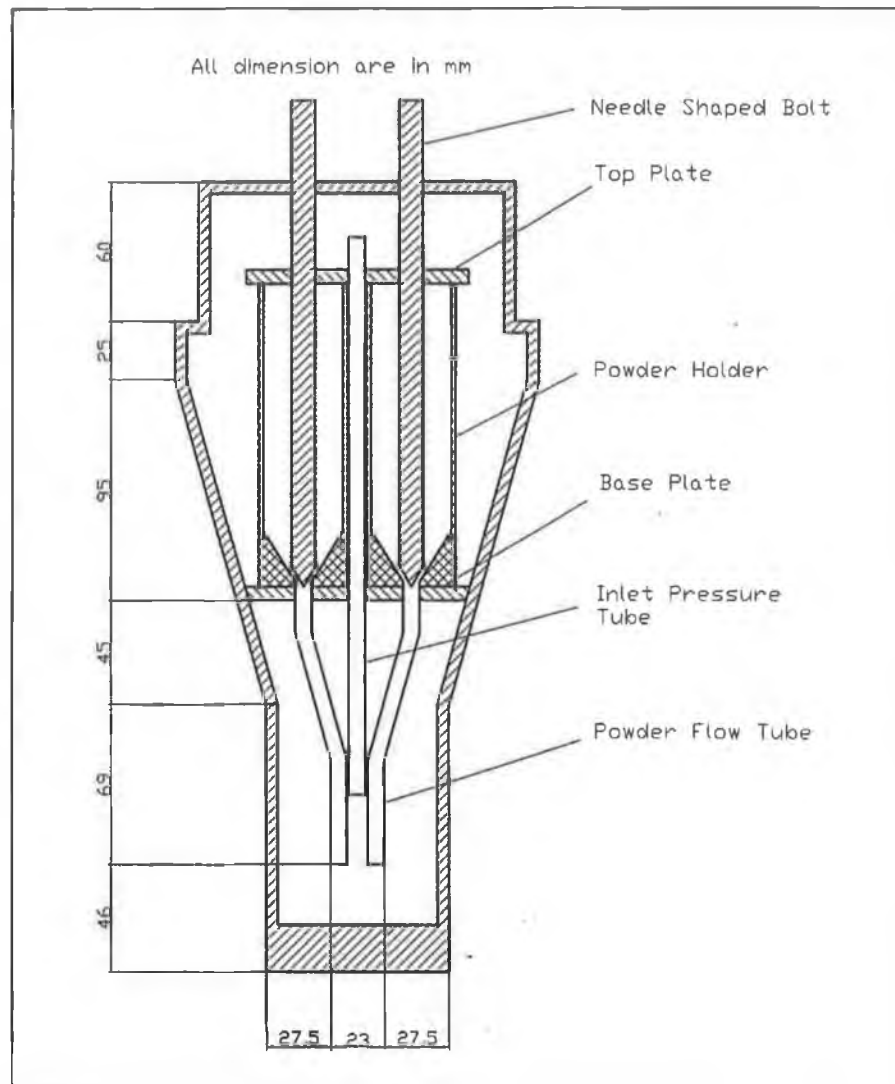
Sectional assembly drawing of the designed parts along with the previous hopper.
